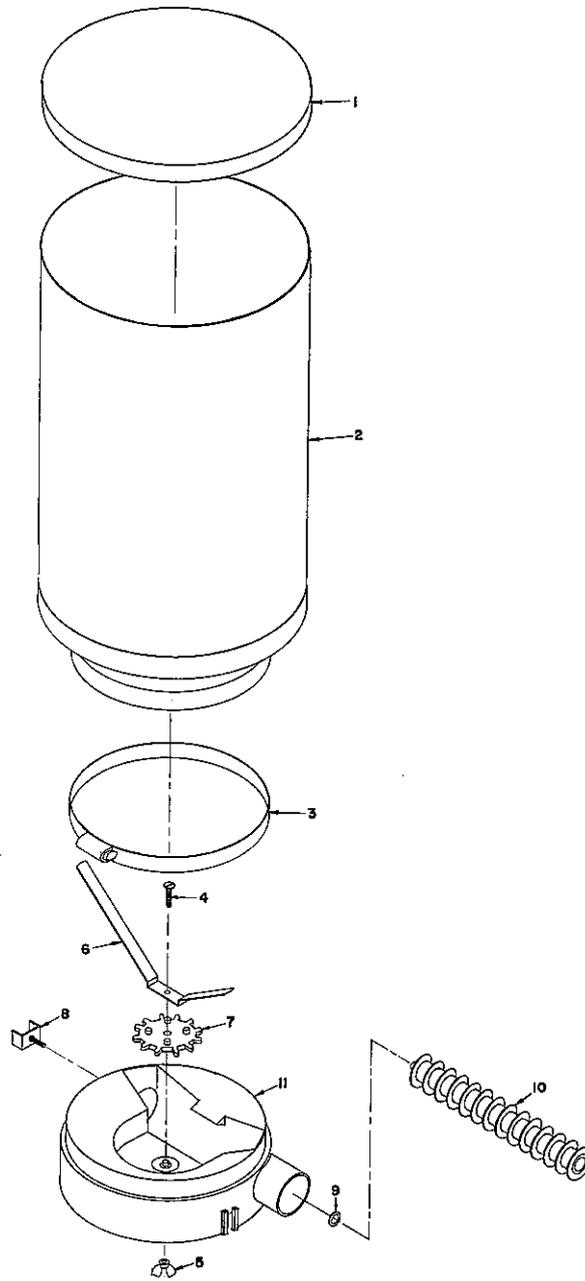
CHOCOLATE CANISTER ASSEMBLY COMPLETE
